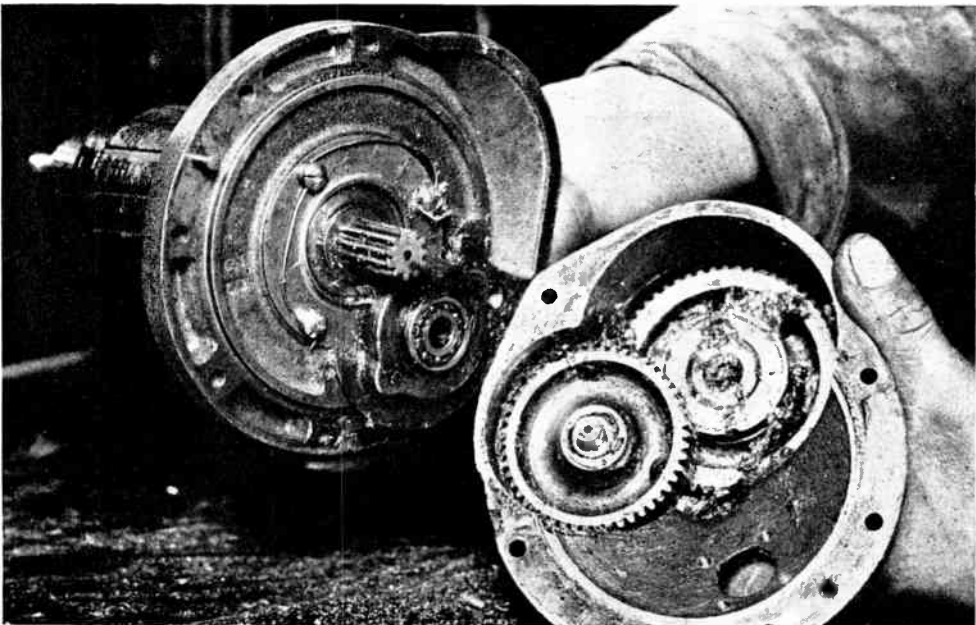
GEAR CASE OF A HEAVY DUTY ELECTRIC DRILL. Showing the gear case dismantled.
